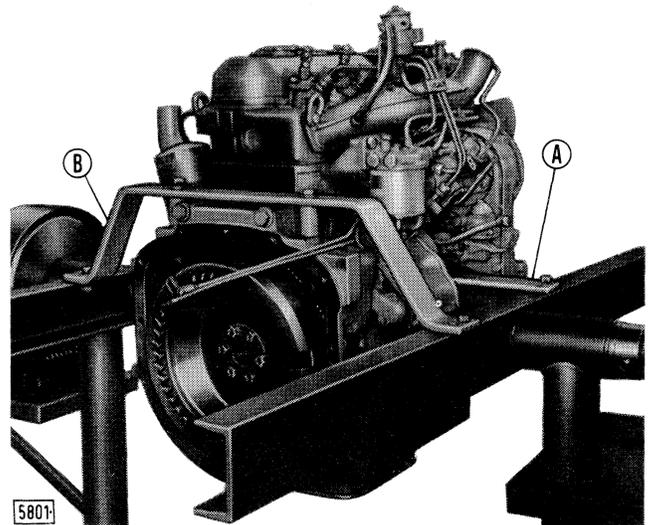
The Engine in position on Rotary Stand Part No. 290090
